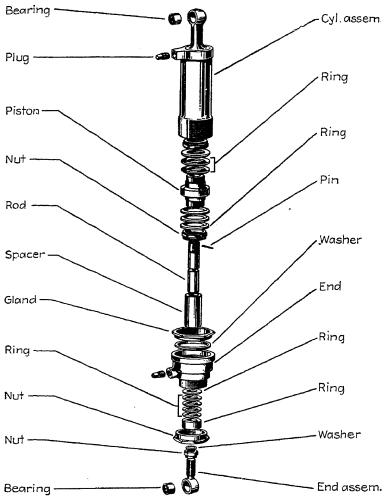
Cowl-flap operating strut. (Courtesy of Douglas Aircraft Co.)
